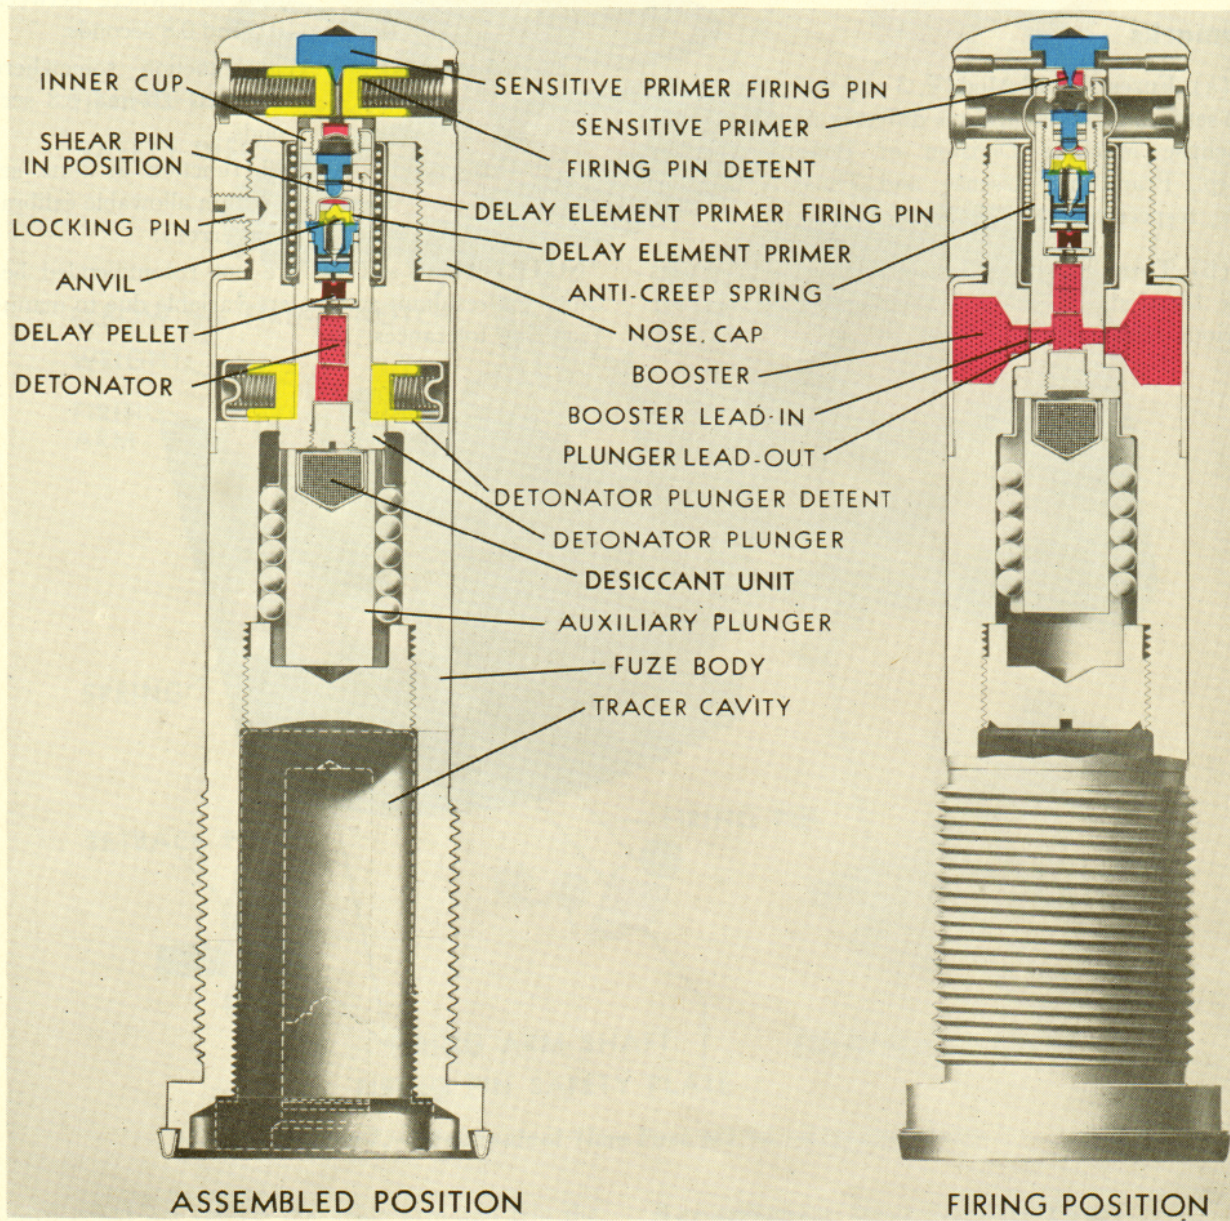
Base Detonating Fuze Mk 19—Sectional View
